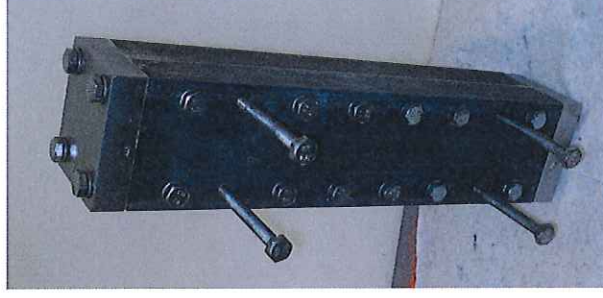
The 4 pieces of the steel mal are held together with steel bolts.
